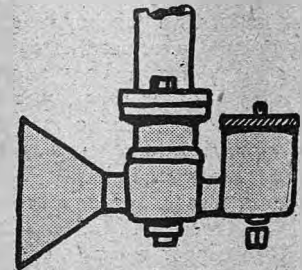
A carburetter with a funnel-shaped air intake as often fitted to Brooklands racing engines.
